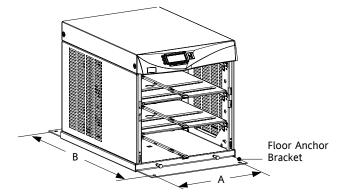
Floor Anchor Brackets Bolted to UPS Cabinet
